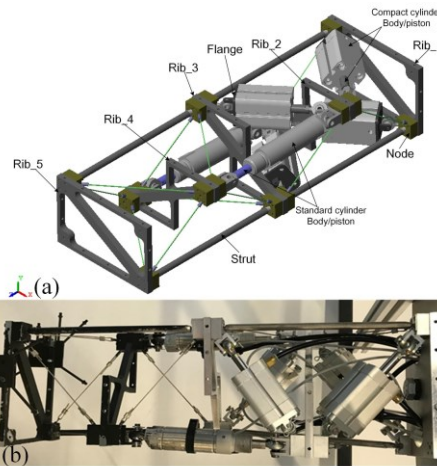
Prototype morphing structure (a) CAD isometric view (b) bench test topview
